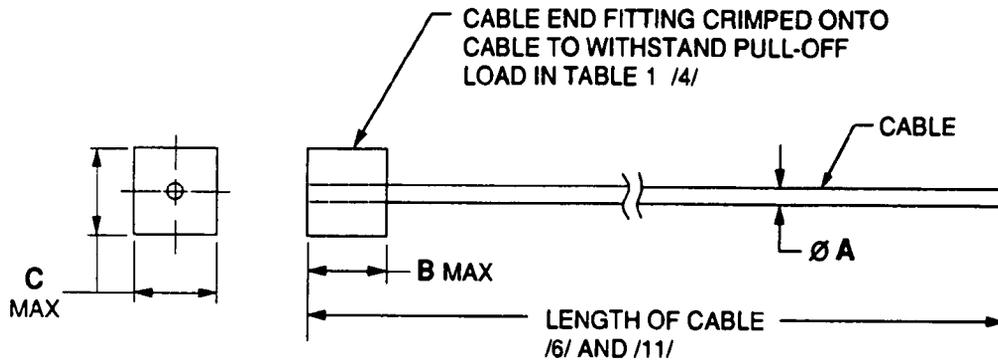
SAFETY CABLE-END FITTING AND CABLE ASSEMBLY
